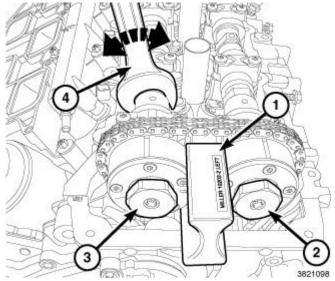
Camshaft Phaser Lock, Oil Control Valves & Wrench Courtesy of CHRYSLER GROUP, LLC
